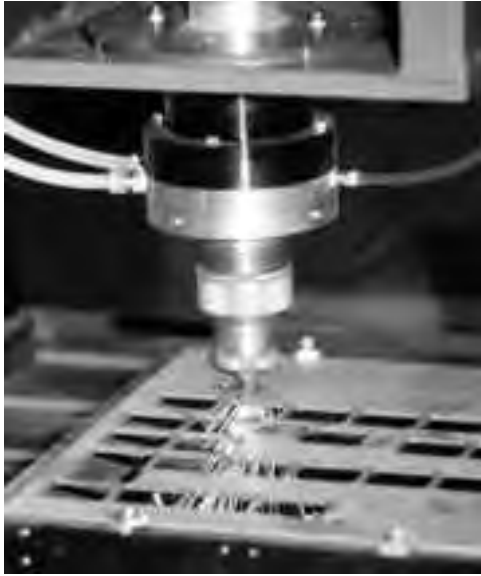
Cutting sheet metal with a laser beam. *Source:* Courtesy of Rofin-Sinar, Inc., and Society of Manufacturing Engineers.
